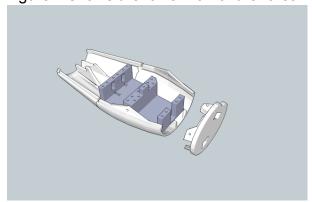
CAD design for the forearm showing the servo bed where the motors are mounted.
